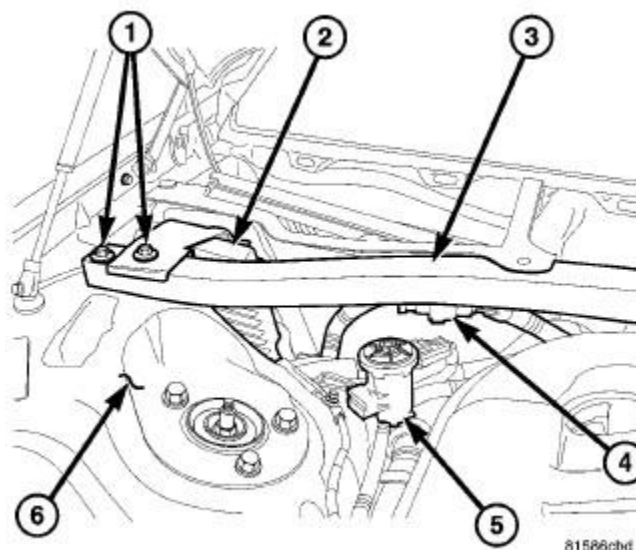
Bolts, PCM, Strut Support, Wire Harness, Purge Solenoid & Passenger Side Strut Tower
